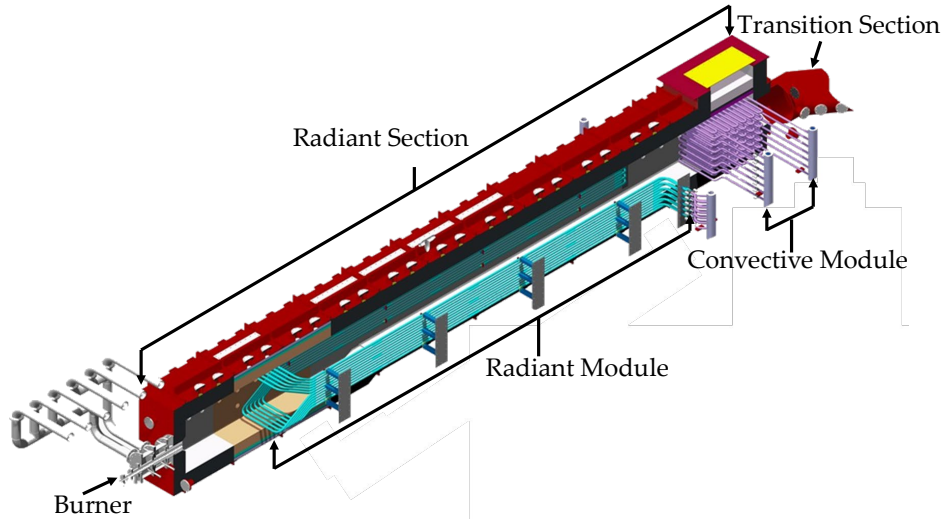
3D Schematic of the primary heater (PHX) in the radiant section of the L1500. The radiant module of the PHX is shown in blue and the convective module of the PHX is shown in purple.
